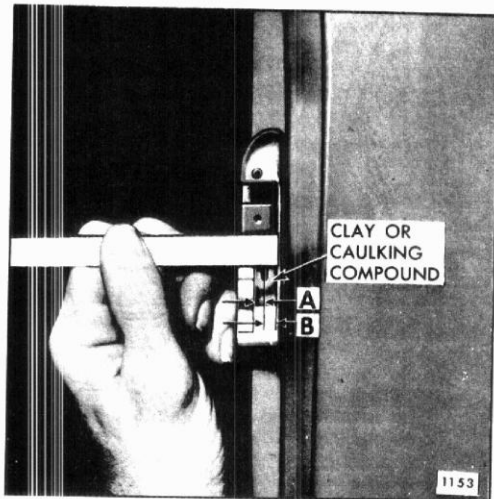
Tail Gate Lock Striker Caulking Check
